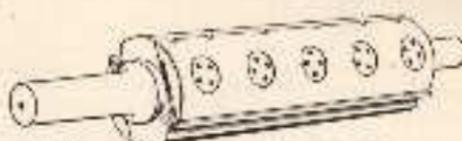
Round cylinder and safety cap. Two thin high-speed tool steel knives.
